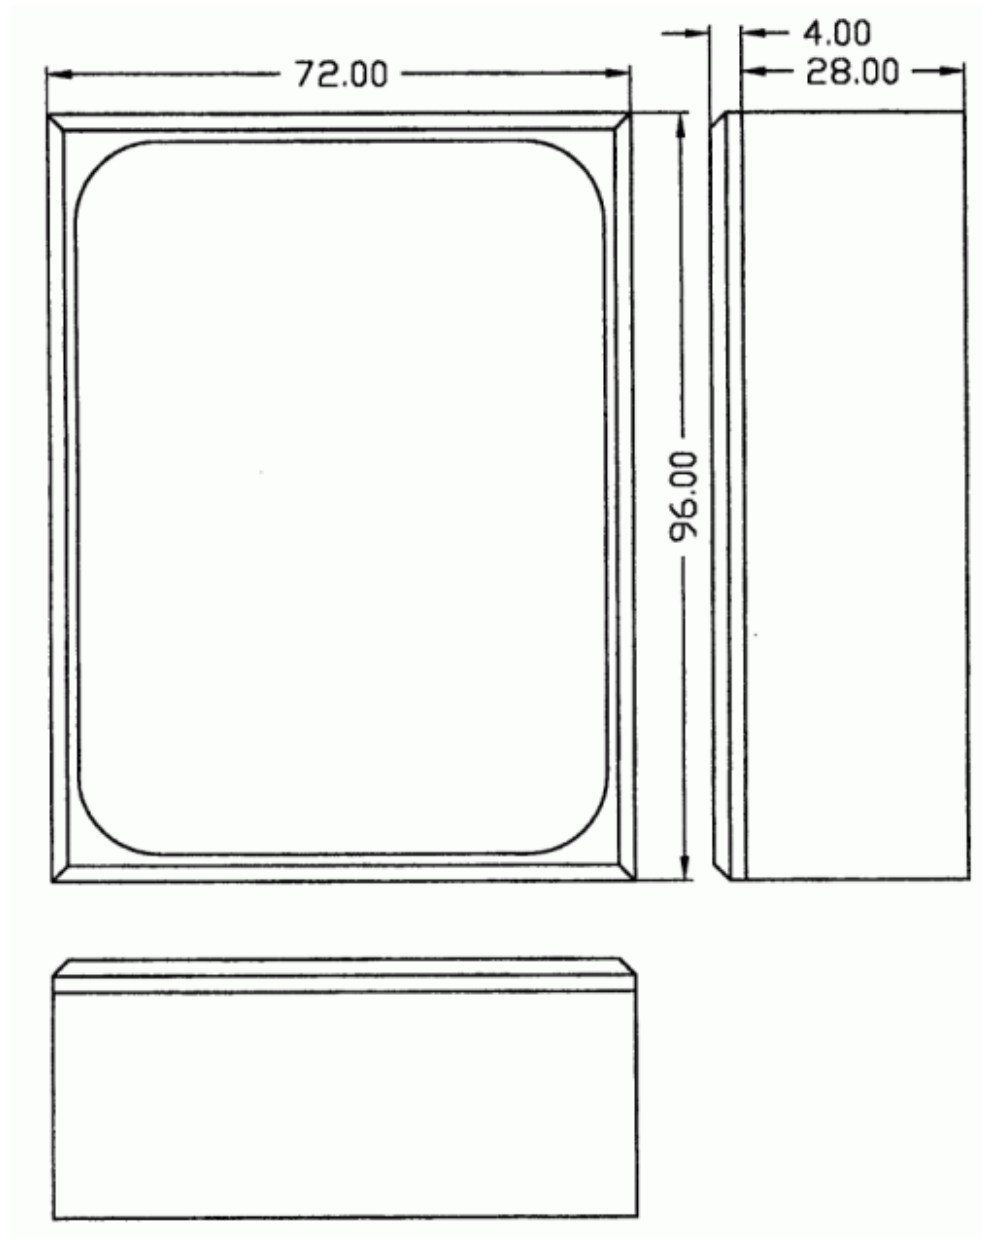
Technical dimensional drawing TERM 5 / TERM 6
